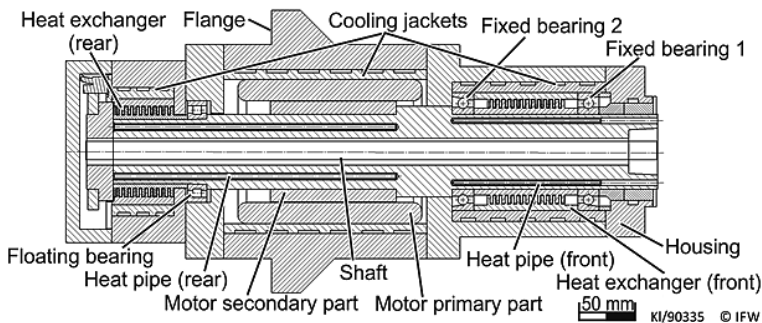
Cross section of spindle prototype with heat pipes and heat exchangers.
